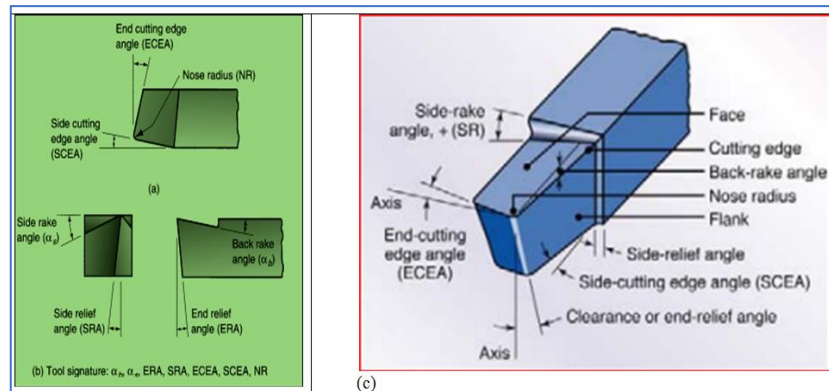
(a) Seven elements of single-point tool geometry 2D, and (b) the tool signature convention defines seven elements (c) elements of single point cutting tool geometry 3D[34].
